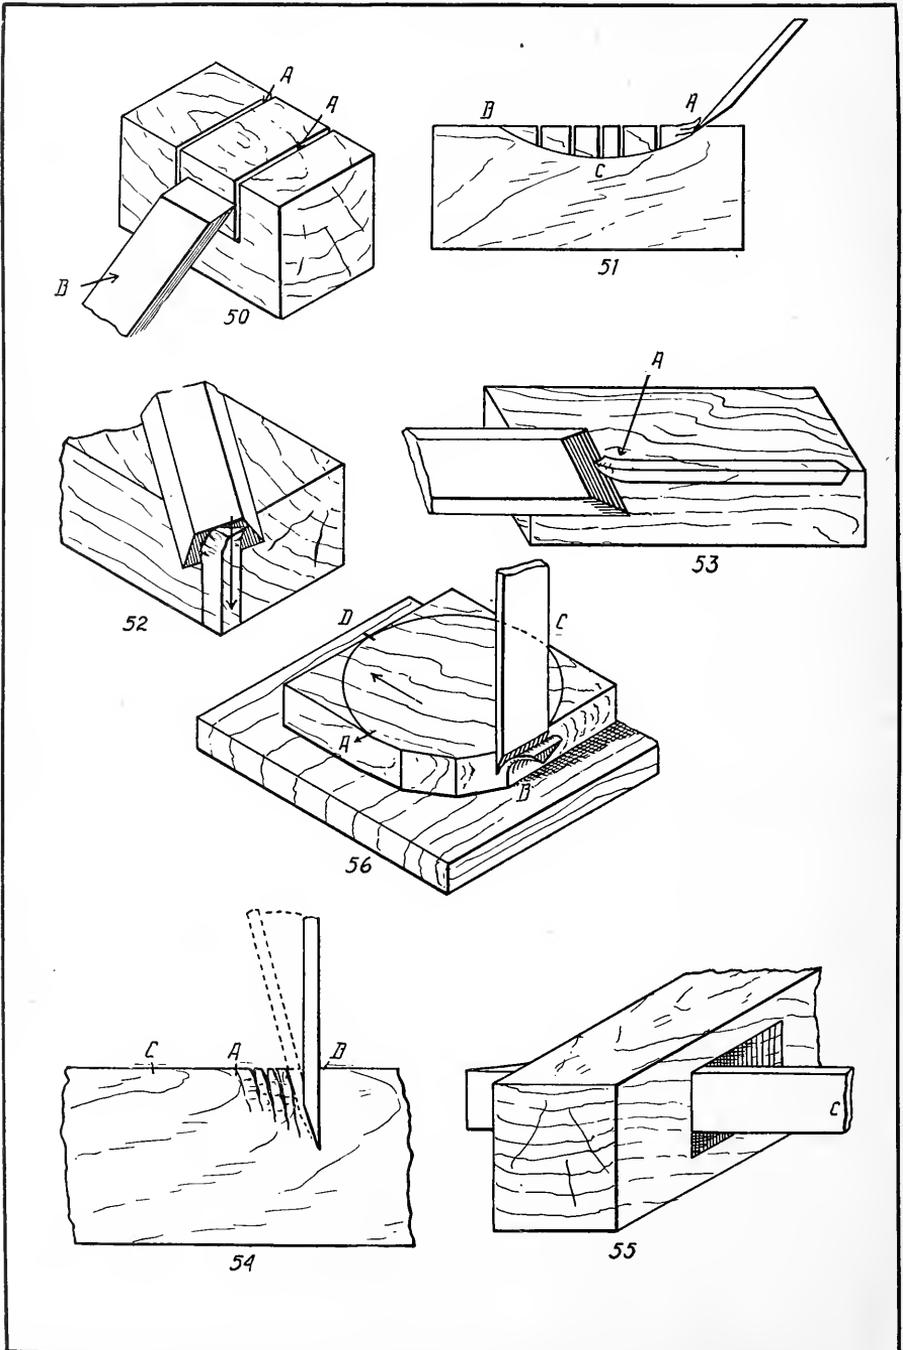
HALVING JOINTS. FIG. 51.—CUTTING CONCAVE SURFACE. FIG. 52.—CUTTING END BEVEL. FIG. 53.—CUTTING EDGE BEVEL. FIG. 54.—CUTTING MORTISE. FIG. 55.—TESTING MORTISE. FIG. 56.—CUTTING CIRCULAR PIECE.
